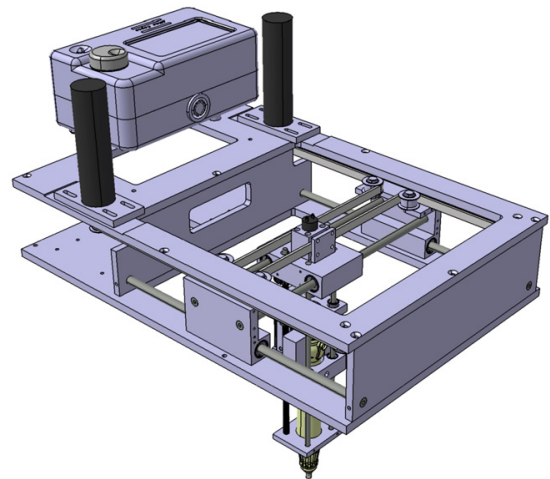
3D CAD illustration of the H-Portal manipulator with screwdriver
